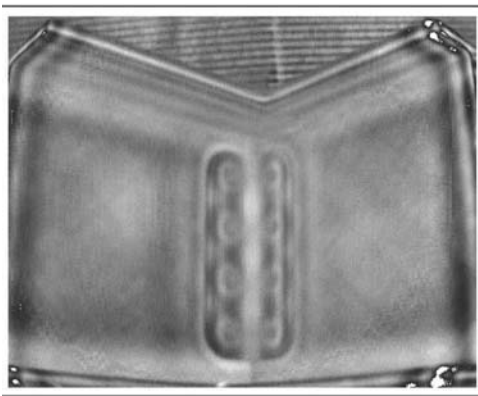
Thermal inspection results for cruciform 1, rivet 2 top.
